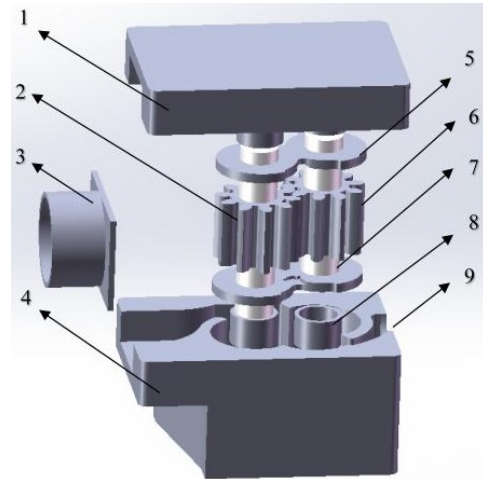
Structure diagram of high-speed gear pump: 1) upper pump cover; 2) driving gear; 3) inlet; 4) lower pump cover; 5) floating side plate; 6) driven gear; 7) pump shaft; 8) needle roller bearing; 9) outlet.
